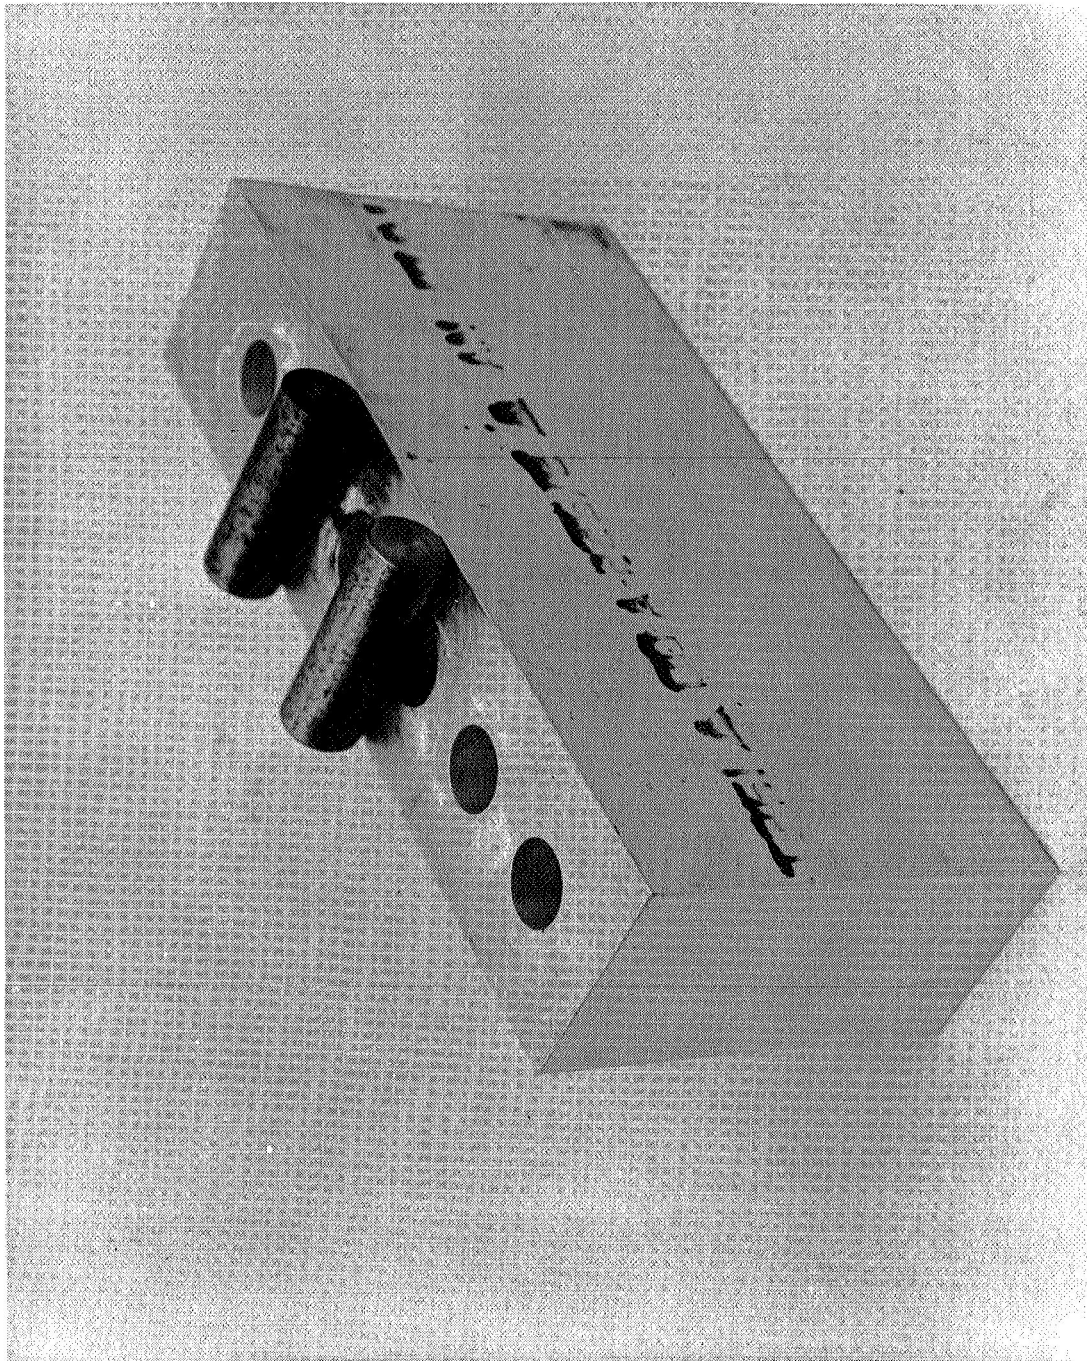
COMPRESSION MOLD FOR ATTACHMENT HOLE PLUGS
